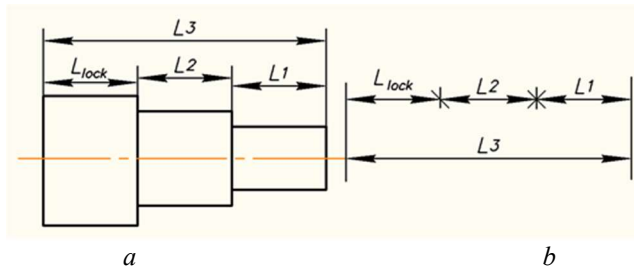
Construction of the dimension chain of stepped shaft: *a* – chart of dimensions; *b* – dimensions chain
